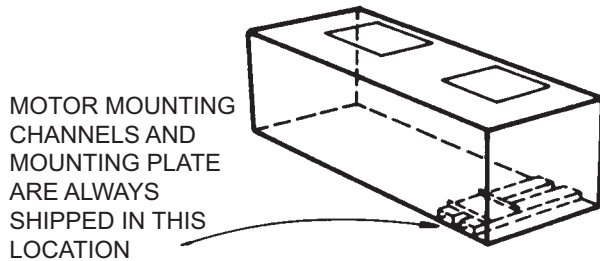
Shipping Location for Motor Mounting Assembly - NE240
